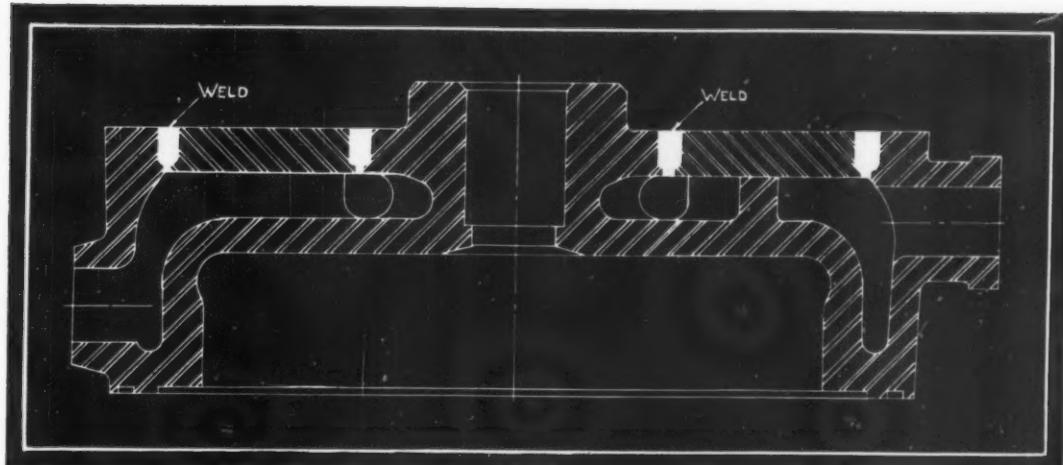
Defects were eliminated by redesigning this diesel engine head casting to utilize the cast-welded assembly method
